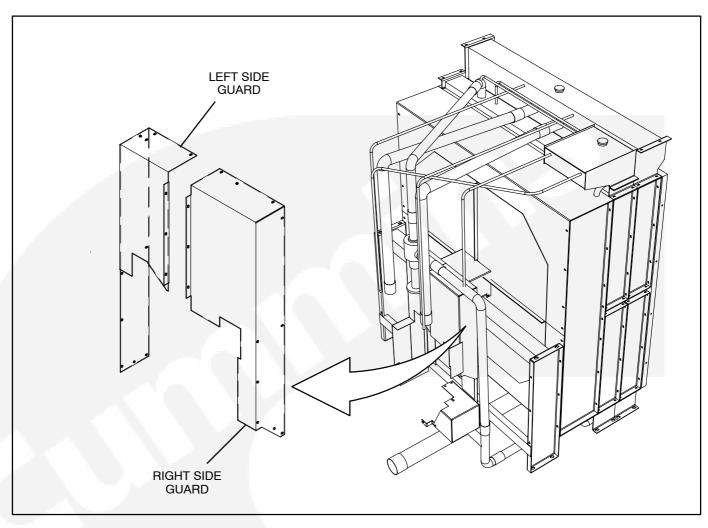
FAN DRIVE GUARD (LEFT/RIGHT SIDE)
